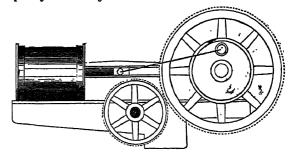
Horizontal Cylinder Screw-engine, Geared.
